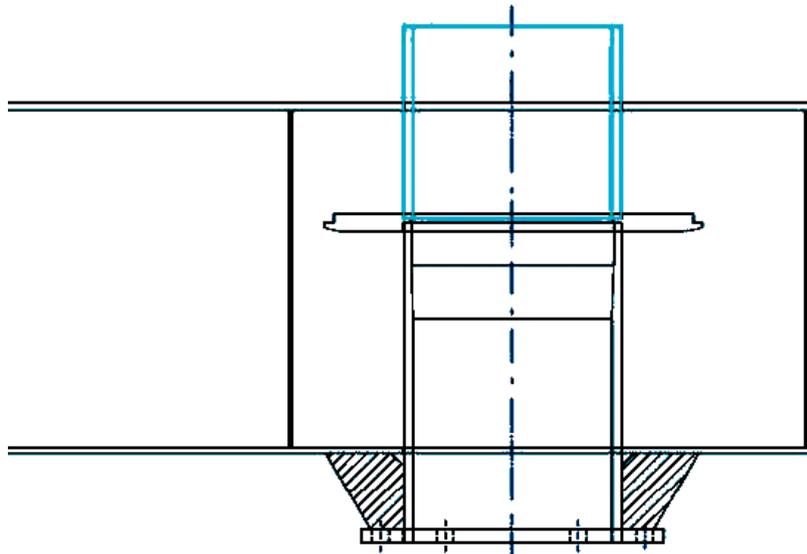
shows the jig (in light blue) which is used to align the top plate with the runner housing
